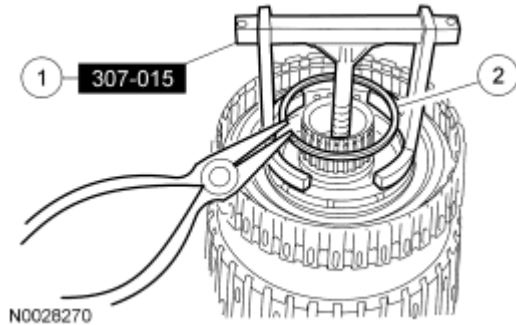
Forward/Coast Clutch Return Spring Retaining Ring & Special Tools
